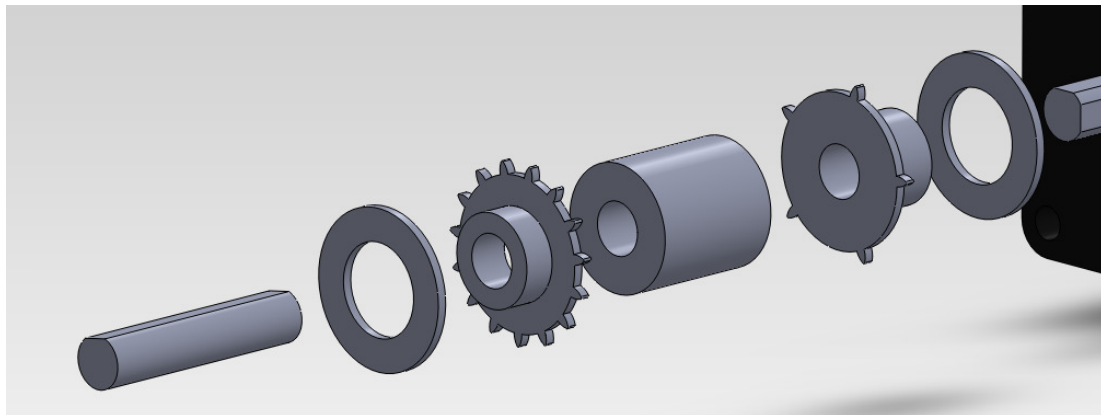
Exploded Sprocket Roller: Radius = 11.94mm
